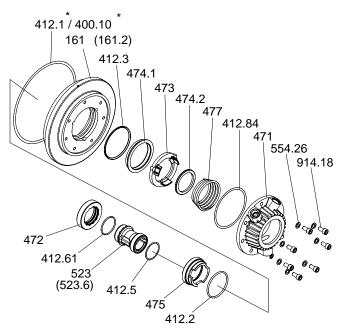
Dismounting the product-side MUNSCH-REA-F mechanical seal
